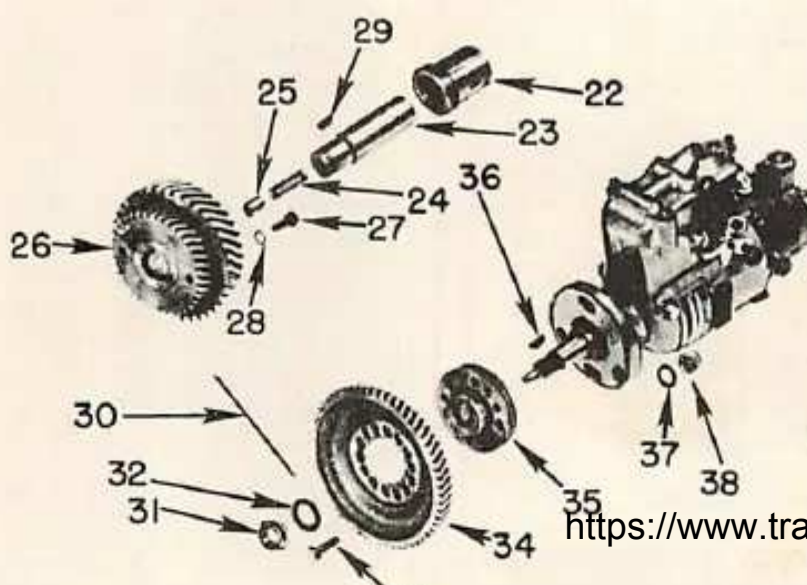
Exploded view of diesel fuel injection pump idler and drive gears. Matched set of idler gears (26) are fastened together by two capscrews (27).
